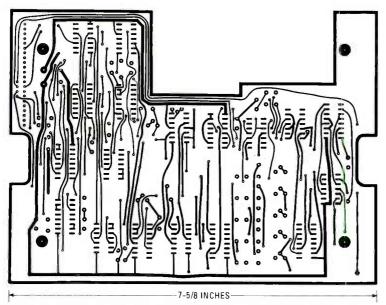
THE BOARD B solder-side foil pattern is shown here, also reduced 50 percent.
